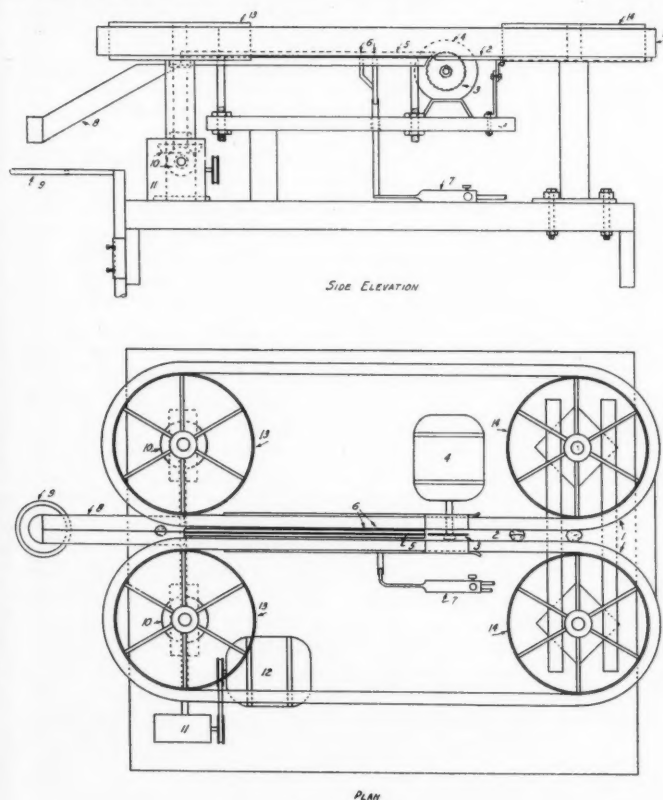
DETAIL DRAWINGS OF NUT CRACKER
